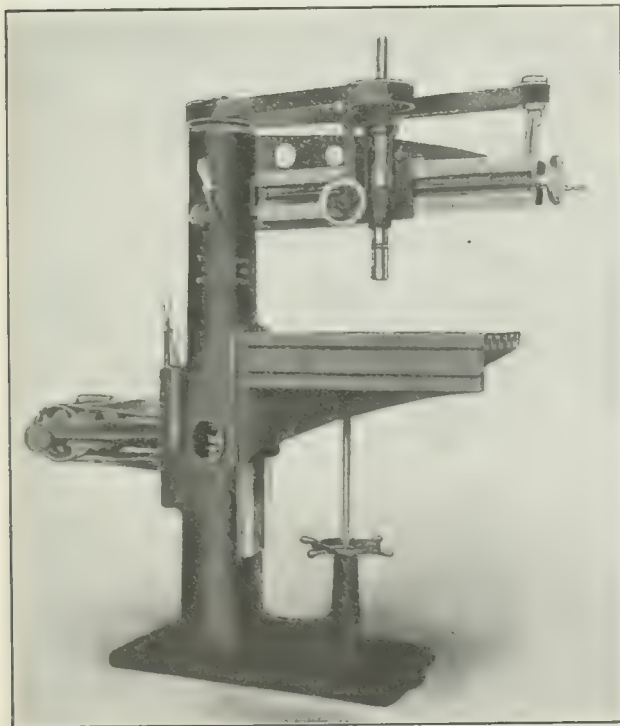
The New 30-In. High Speed Radial Drill Built by the Midland Machine Company, Detroit, Mich.
